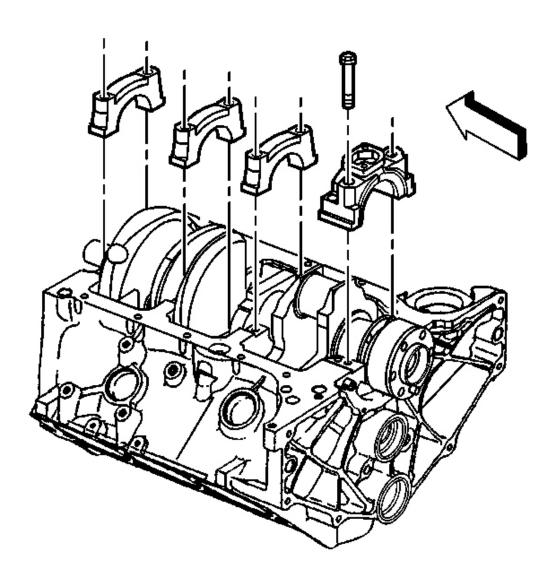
View Of Crankshaft Bearings & Crankshaft Bearing Caps Courtesy of GENERAL MOTORS CORP.
